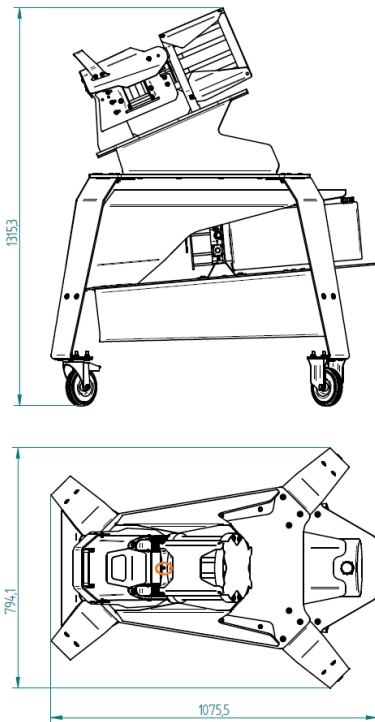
Dimensions of the mobile chain cutter, including attachment points marked in orange
